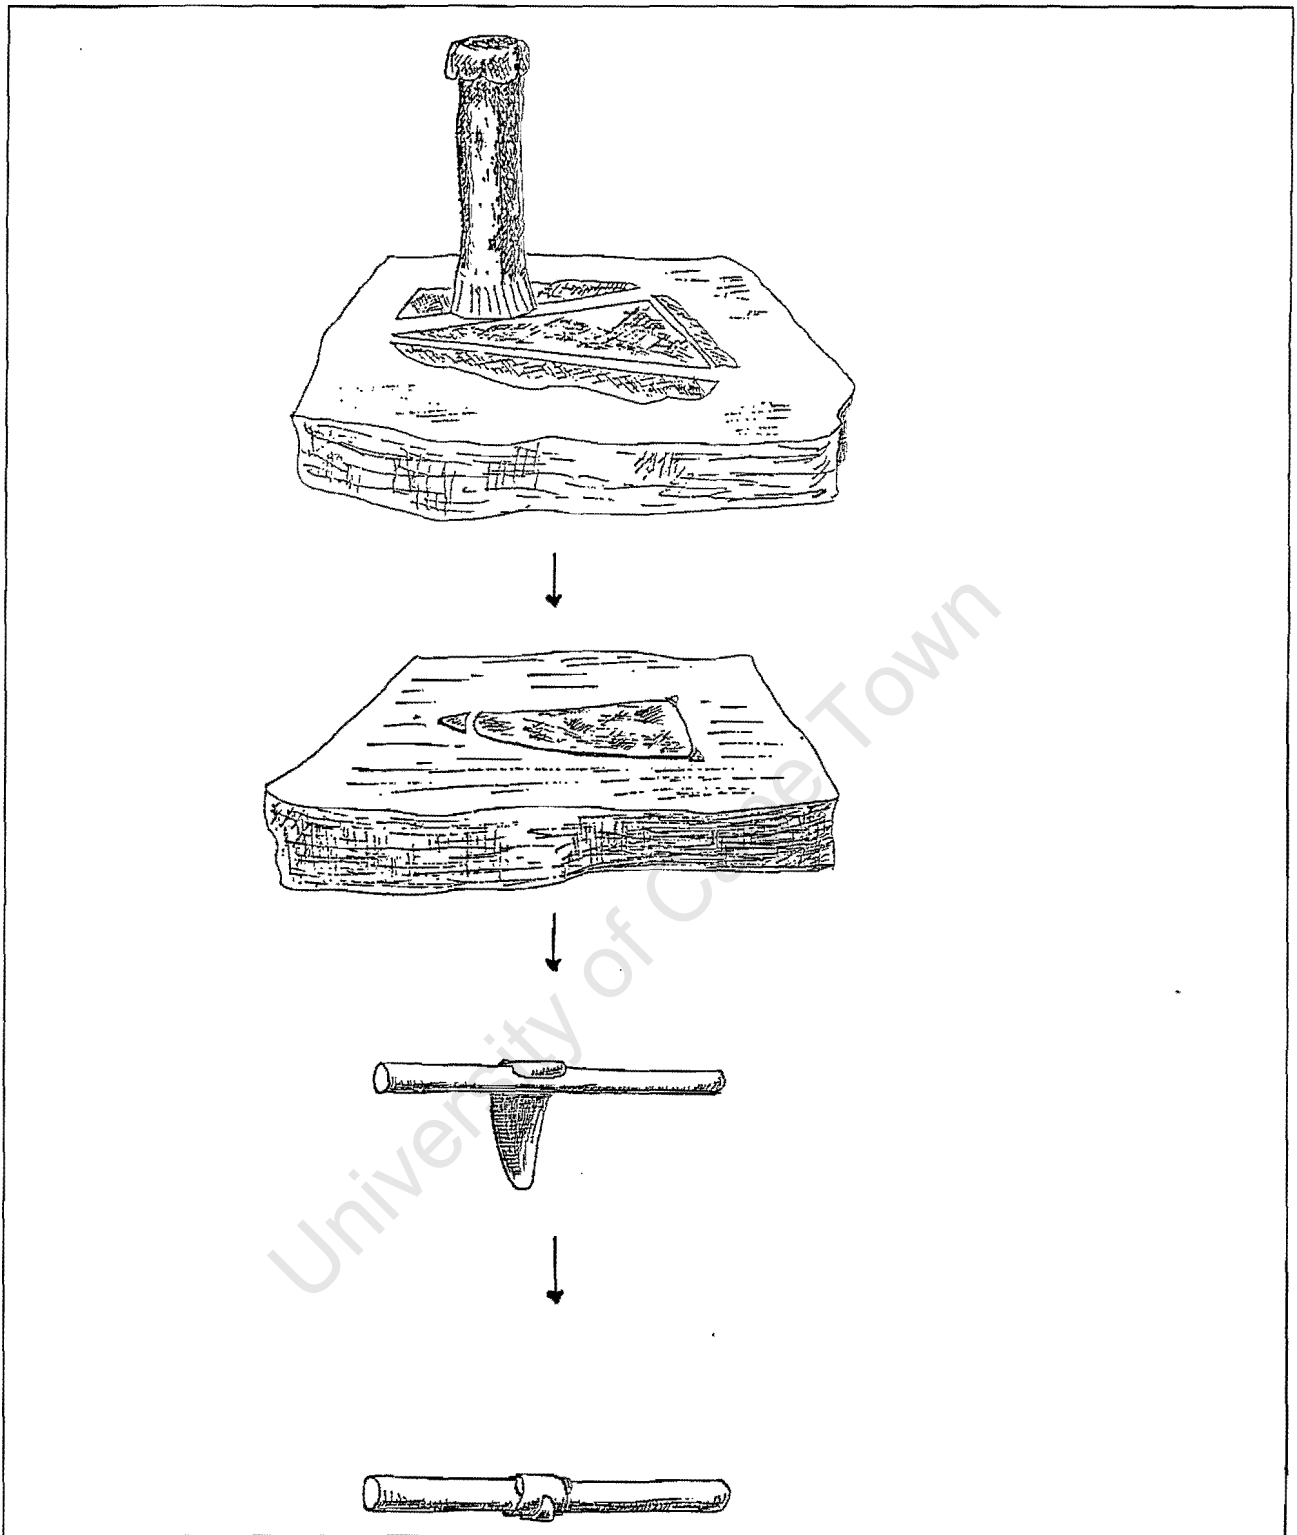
Rolled Beads: A piece of foil is produced and cut into a long triangular shape. The ends are rounded. This leaf is then folded around a rod to produce a rolled bead. (Scale: Bead has an external diameter of approximately 10 mm.) (Drawing by C. Jardine)
